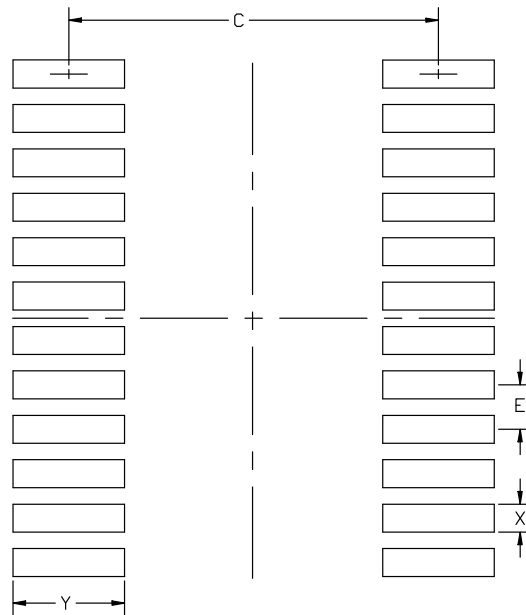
QSOP24 PCB Land Pattern Drawing
